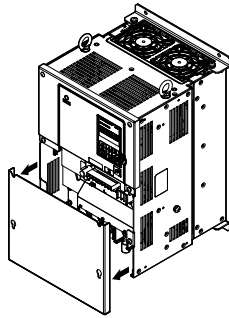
Removing the Terminal Cover on an IP00/Open Type Enclosure Drive
